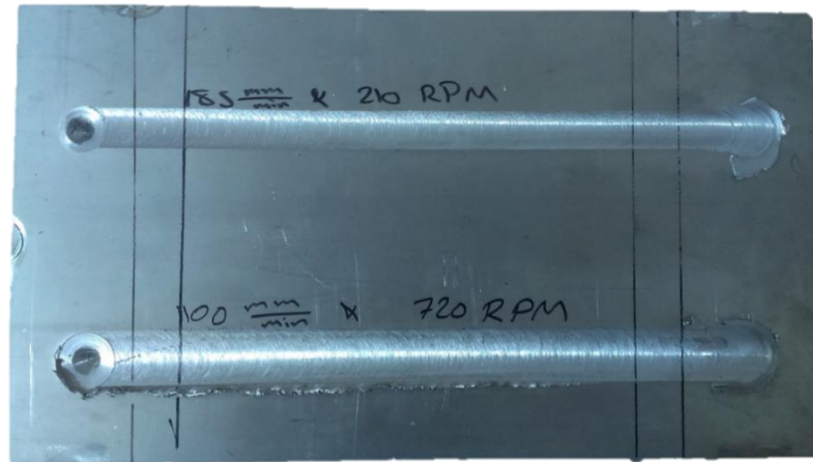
Top View of the plate on which the cold and hot parameter sets were applied
